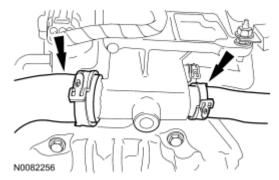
Locating Evaporative Emissions (EVAP) Tube From Intake Manifold Courtesy of FORD MOTOR CO.
